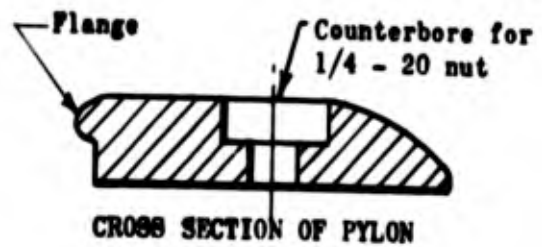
MODIFICATIONS FOR RETAINING AIR BAG UNITS IN MOUNTING BASES
